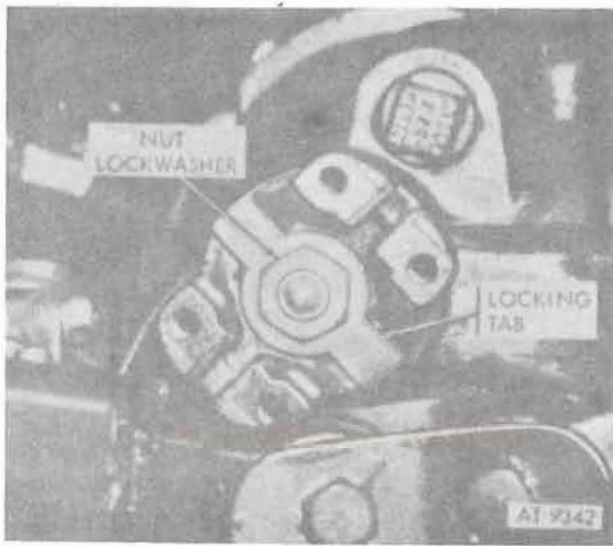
Pinion shaft flange nut, locking tab, and lockwasher.
